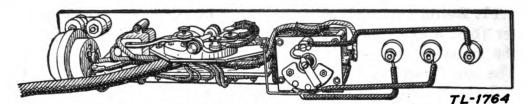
Radio control box BC-235 or BC-235-A, interior view of panel assembly.
